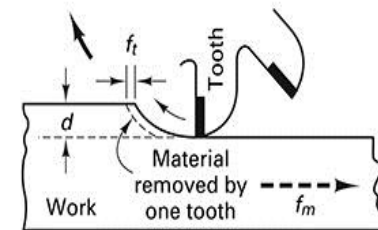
Peripheral milling can be performed on a horizontal-spindle milling machine. The cutter rotates at rpm N_s , removing metal at cutting speed V . The allowance for starting and finishing the cut depends on the cutter diameter and depth of cut, d . The feed per tooth, f_t and cutting speed are selected by the operator or process planner.
